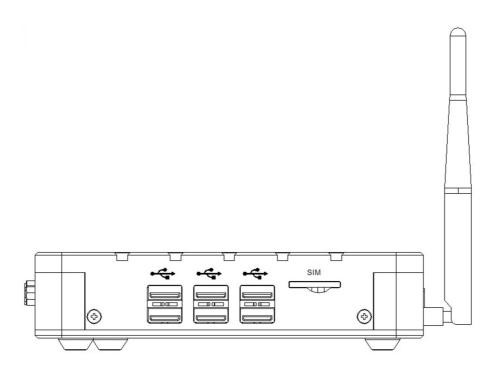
IFC-MBOX2800 mechanical dimension drawing
